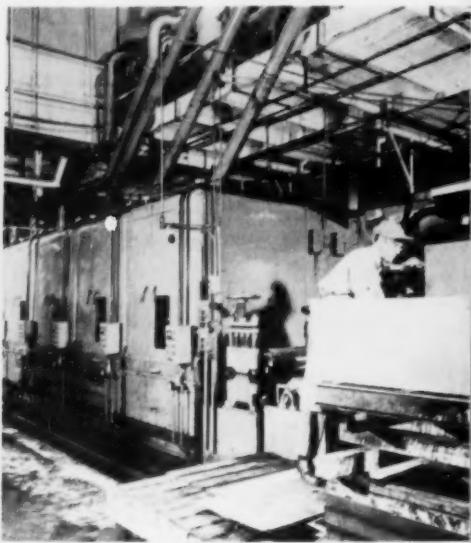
Steel, brass and aluminum sheet and coil can be production polished to within ± 0.0005 inch with the Murray-Way 30-inch micro-polishing units shown herewith.
